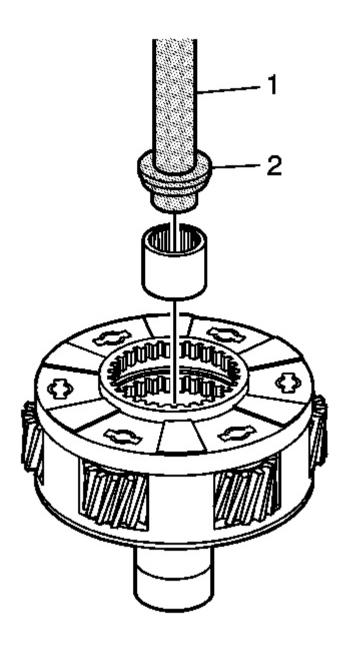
Installing Mainshaft Front Support Bearing Using J 42176 & J 45757 Courtesy of GENERAL MOTORS CORP.
